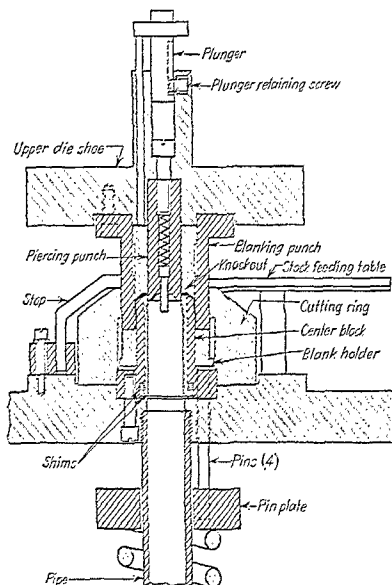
Die combining center piercing with blanking and drawing of thin stock. The stock is blanked and drawn to shape before the center punch cuts to avoid distortion of the hole.
